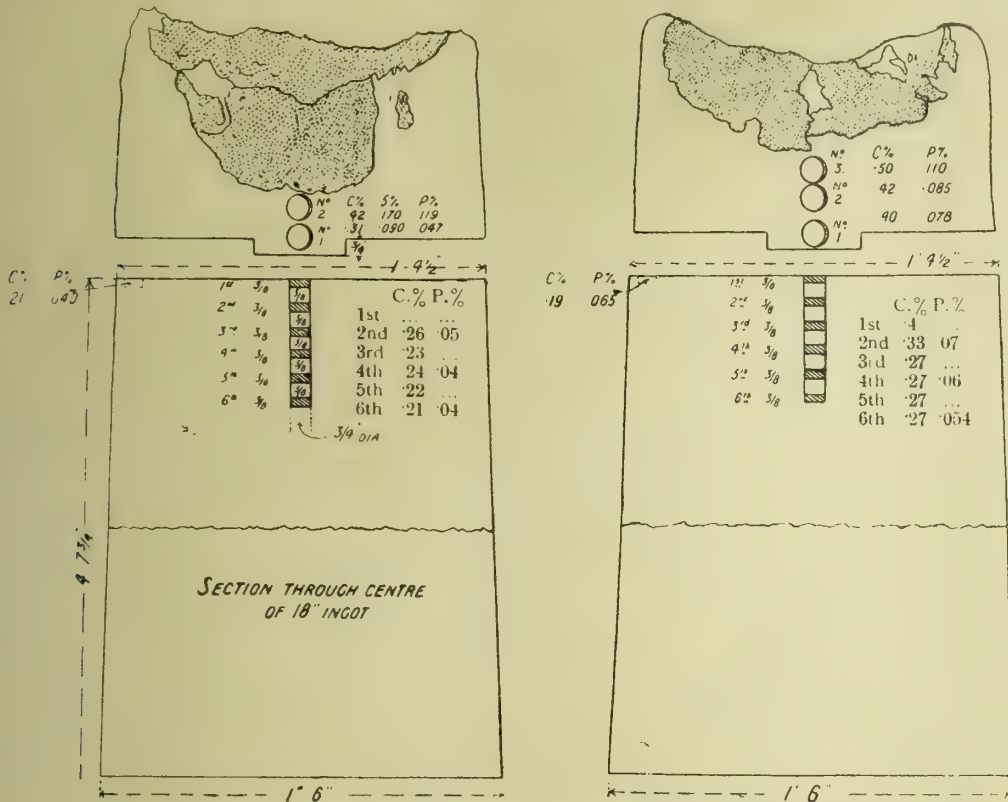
SHOWING METHOD AS APPLIED TO INGOTS WITH THE LARGER END AT BOTTOM.
